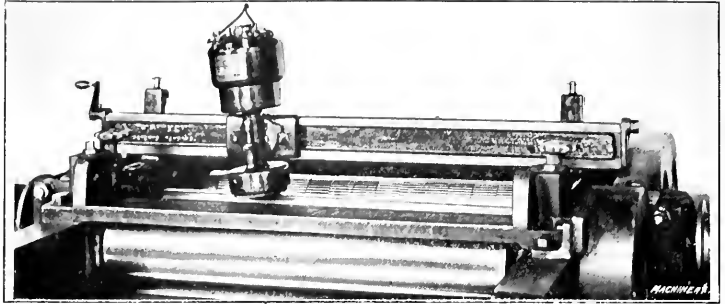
Use of Stockbridge Grinder in sharpening Planer Knives
